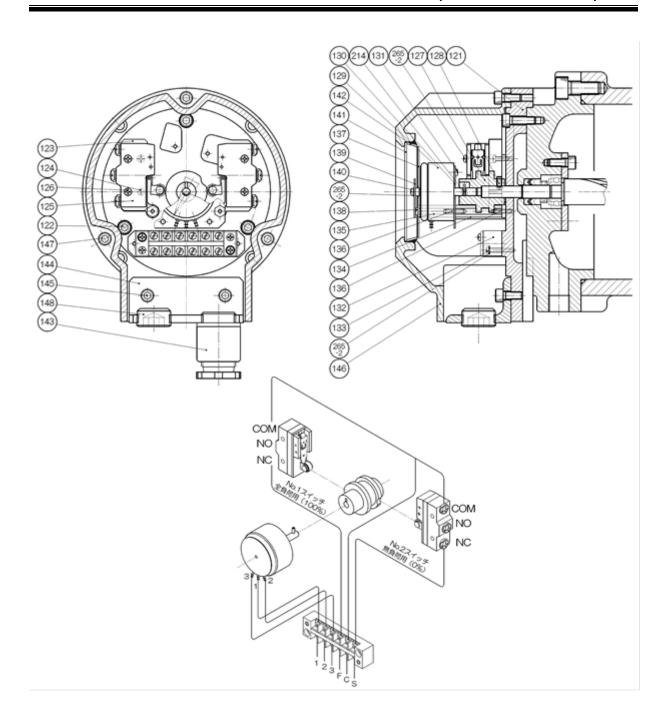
Sectional View of UD-series Unloader Indicator (Traditional standard type)
